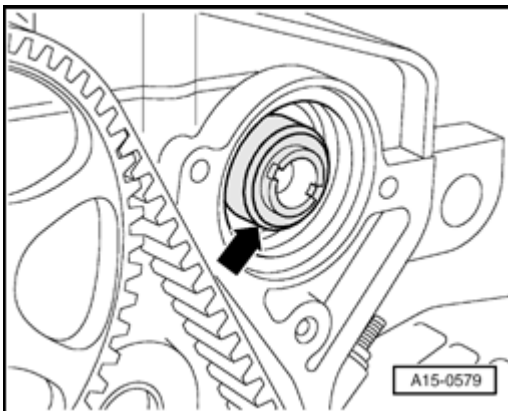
Checking Chamfer Edge On End Of Intake Camshaft For Burrs Or Sharp Areas
